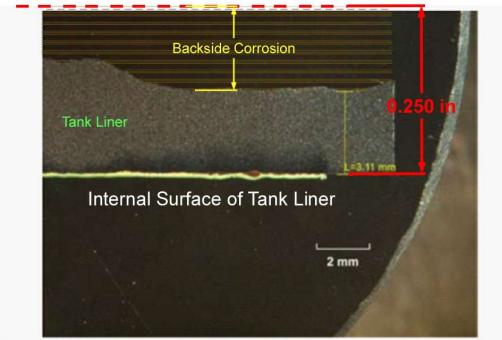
Cross Section of Coupon A1 at Area of Maximum Wall Loss
